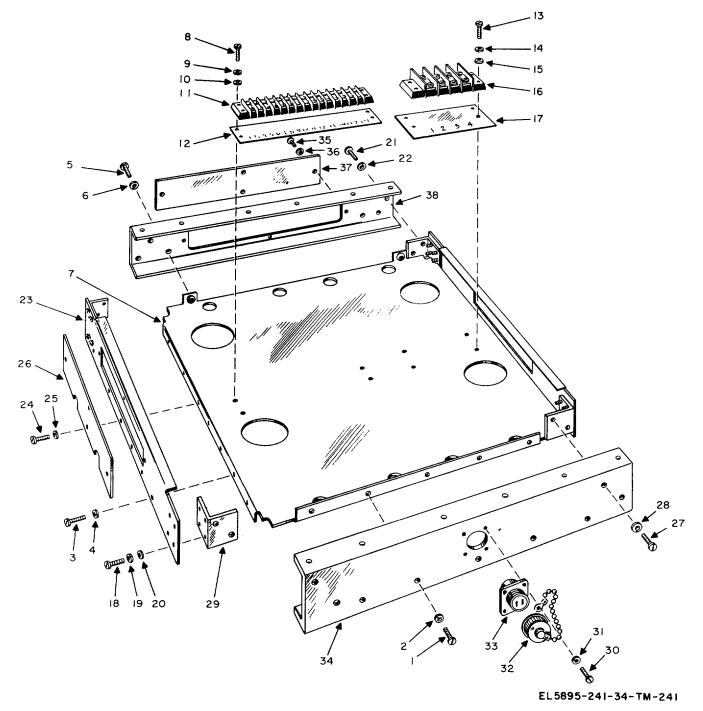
Cabinet, Electrical Equipment CY-3020/FSW-8 base assembly (part of OA-2055/FSW-8), exploded view.
